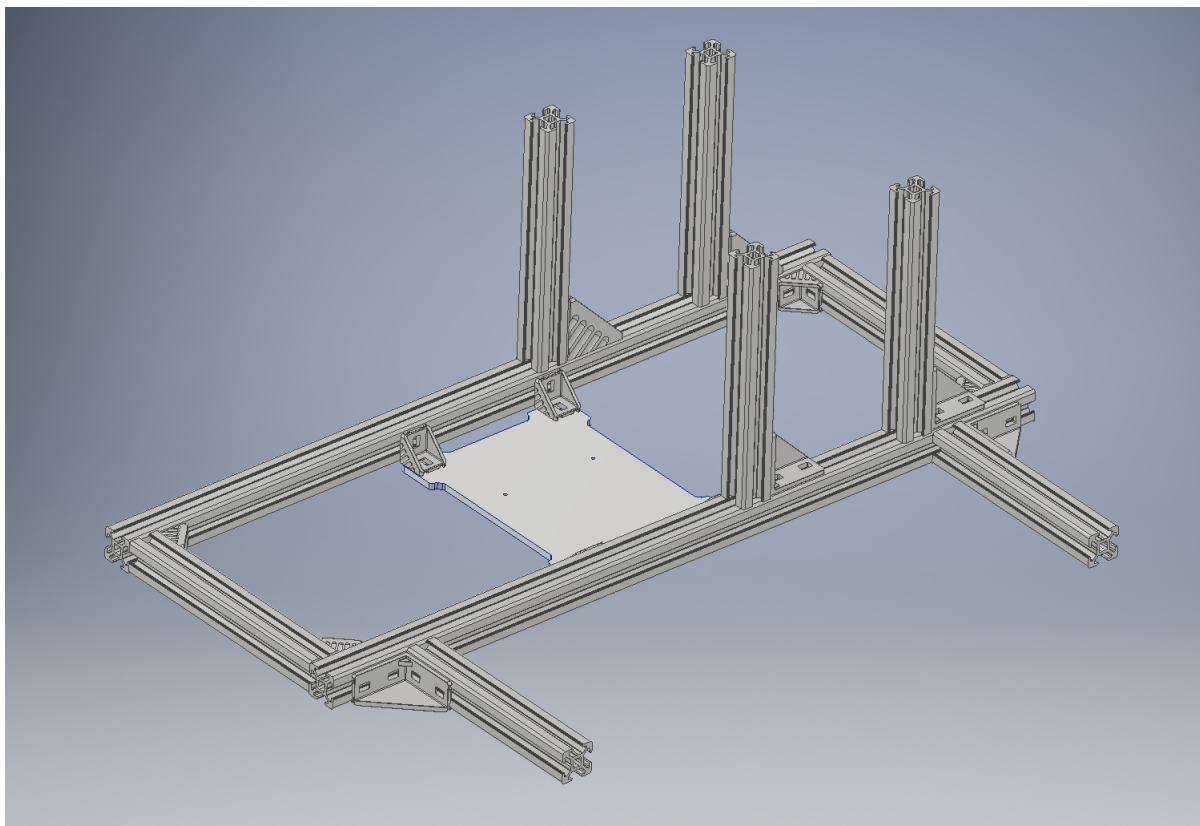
The 2020 aluminium extrusion system with a fixture for the INS in the middle.
